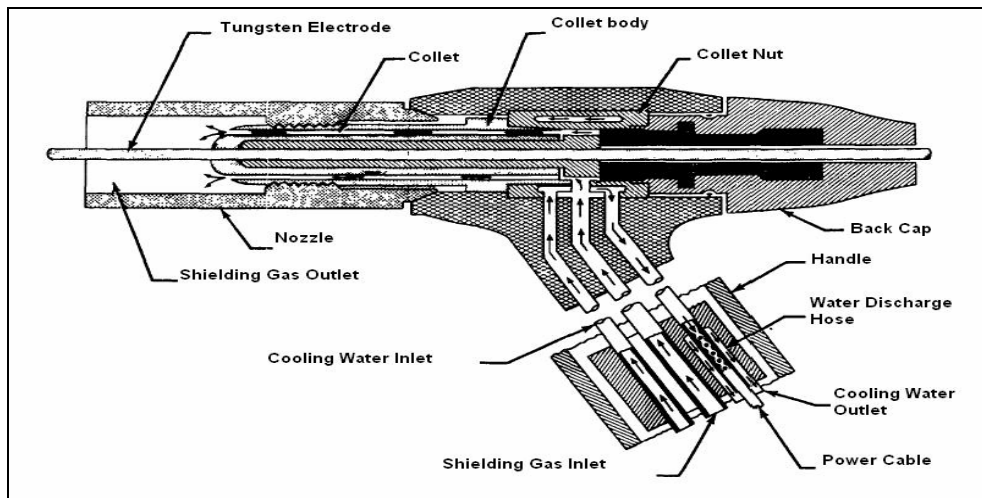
Cross-Sectional View of a Typical Water-cooled Torch for Manual Gas Tungsten Arc Welding. [1]
